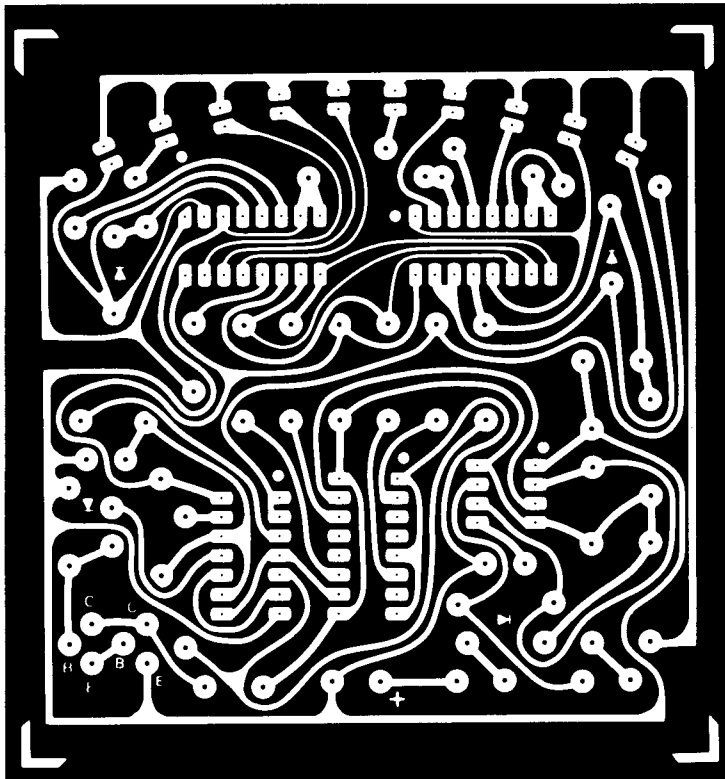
An actual-size foil pattern for a printed-circuit board is shown below. Above is the component layout diagram. Install jumpers first.
